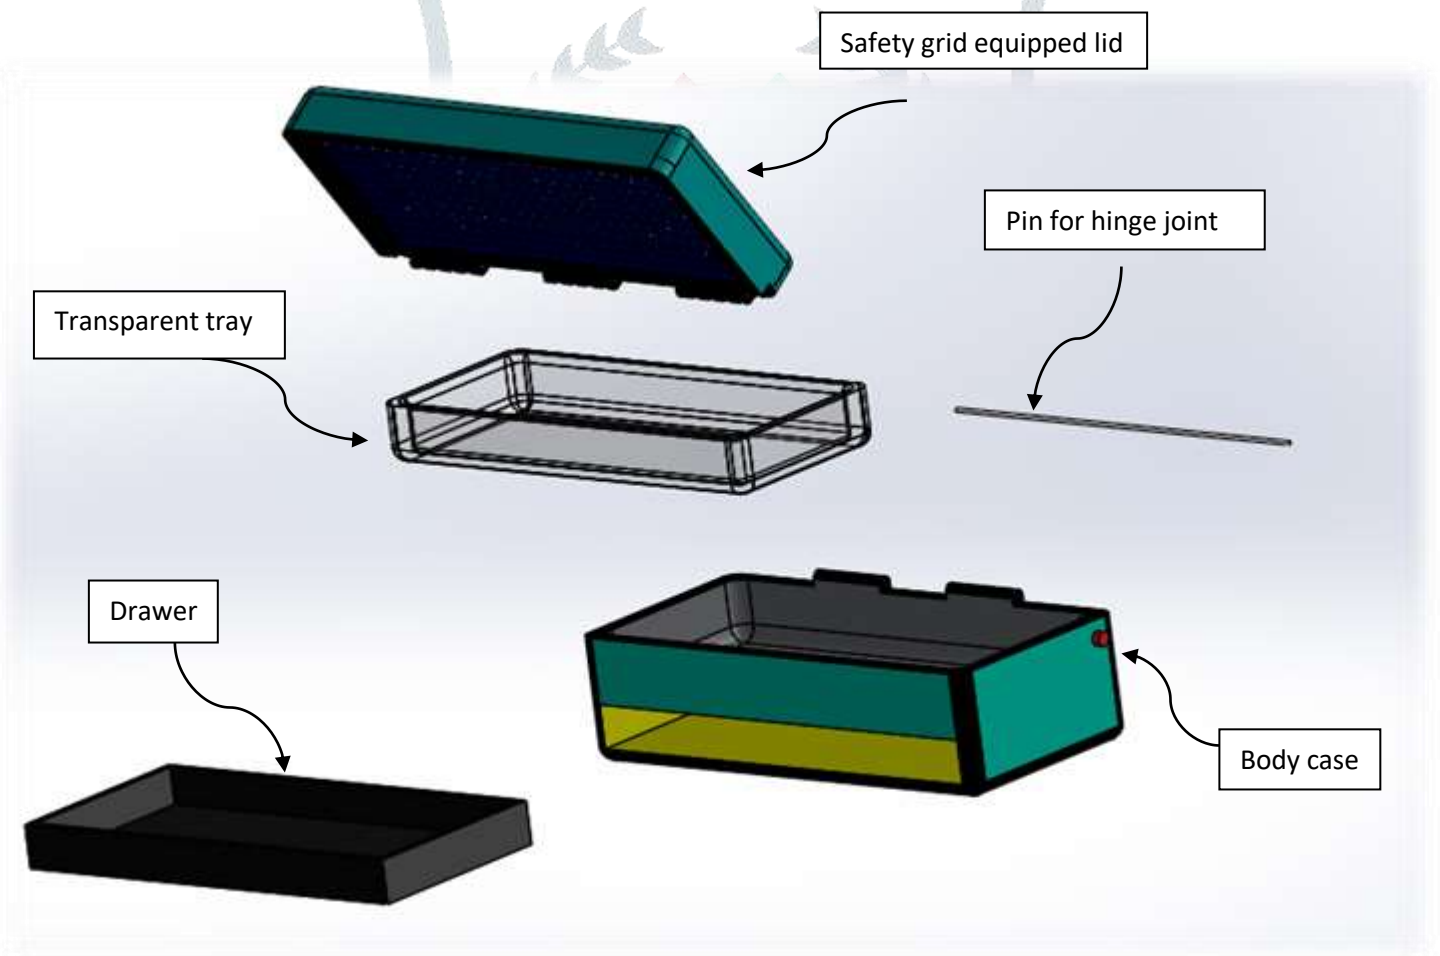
Exploded view of the product (for depiction of all the parts at a time).
